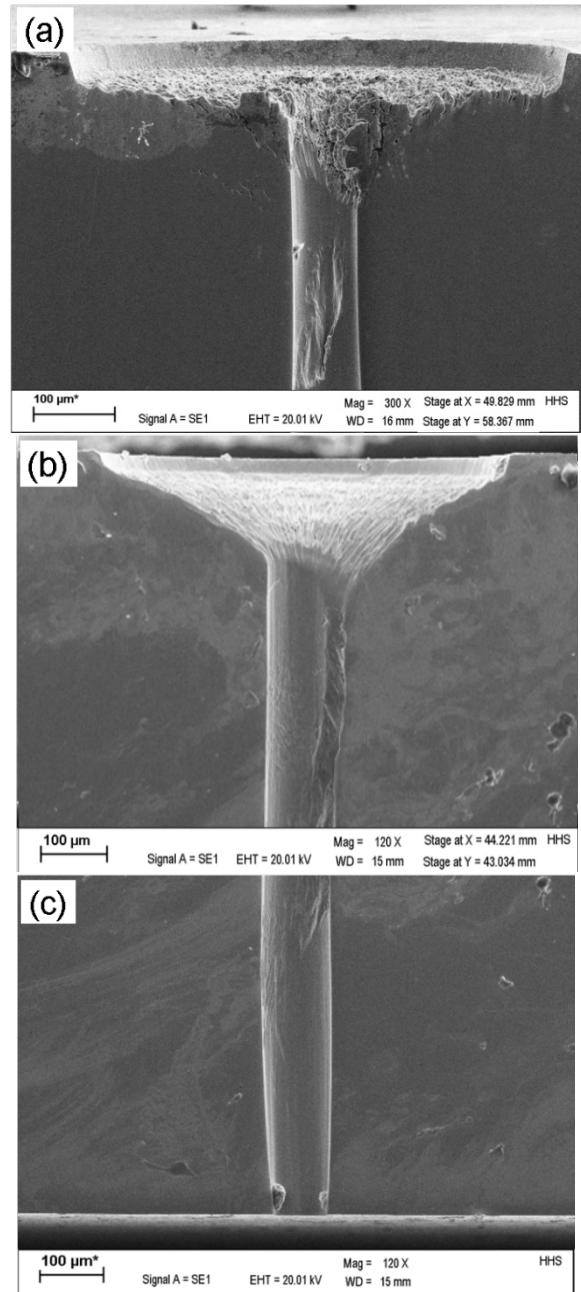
(a) SEM image of a T-shaped and (b) Y-shaped hole drilled by dynamic helical drilling process, (c) the outlet section of the pilot hole in Y-shaped drilling
